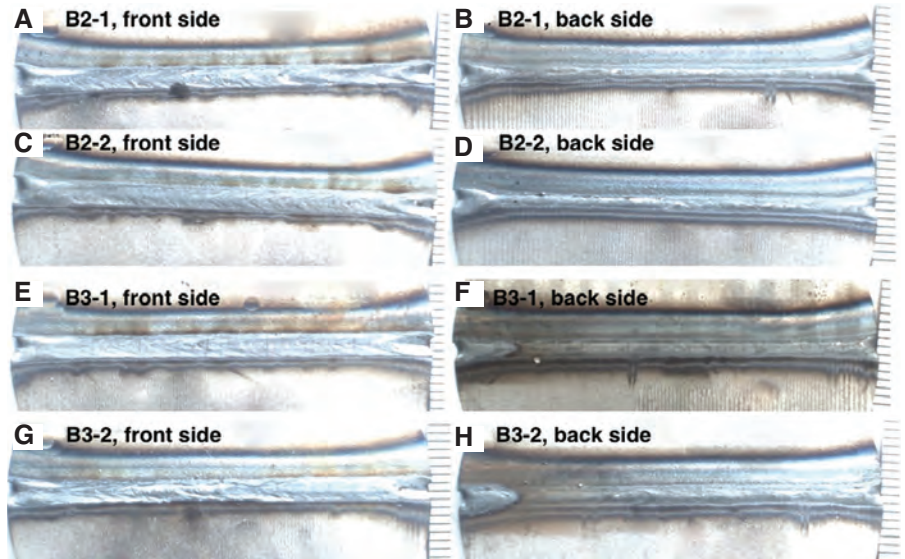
Front side weld formation. A — Specimen B2-1; C — Specimen B2-2; E — Specimen B3-1; G — Specimen B3-2. Back side weld formation. B — Specimen B2-1; D — Specimen B2-2; F — Specimen B3-1; H — Specimen B3-2.
